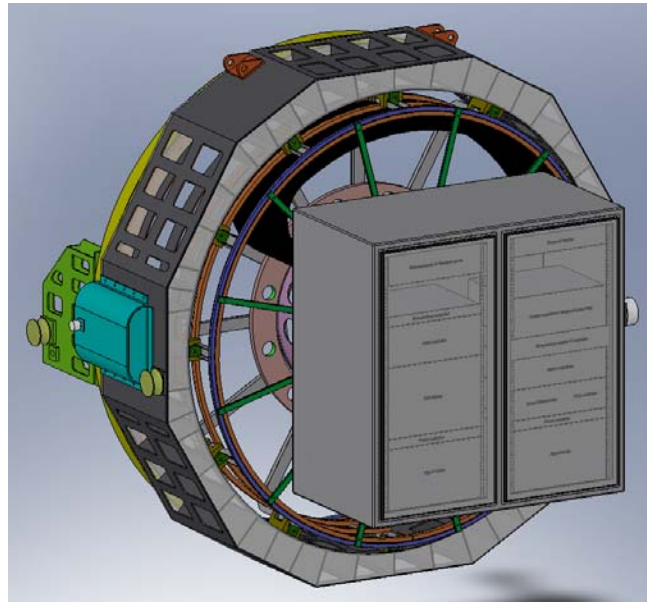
Rear 3/4 View of the Cable Wrap and Electronics Cabinet Assemblies
